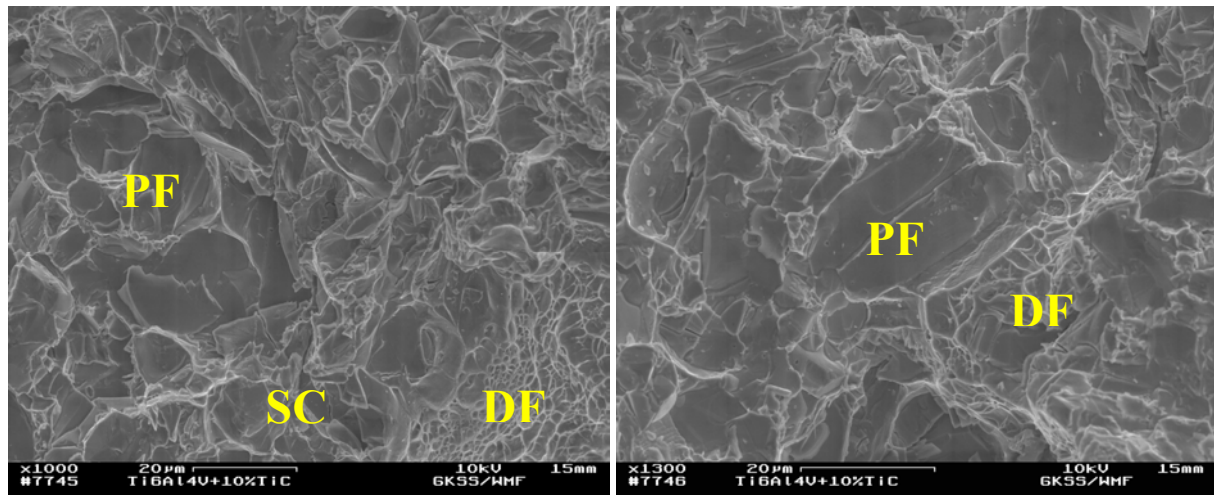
SEM micrographs taken from the fracture surfaces of the tensile specimens tested at 200°C. PF: Particle fracture. SC: Secondary cracking. DF: Ductile fracture.
